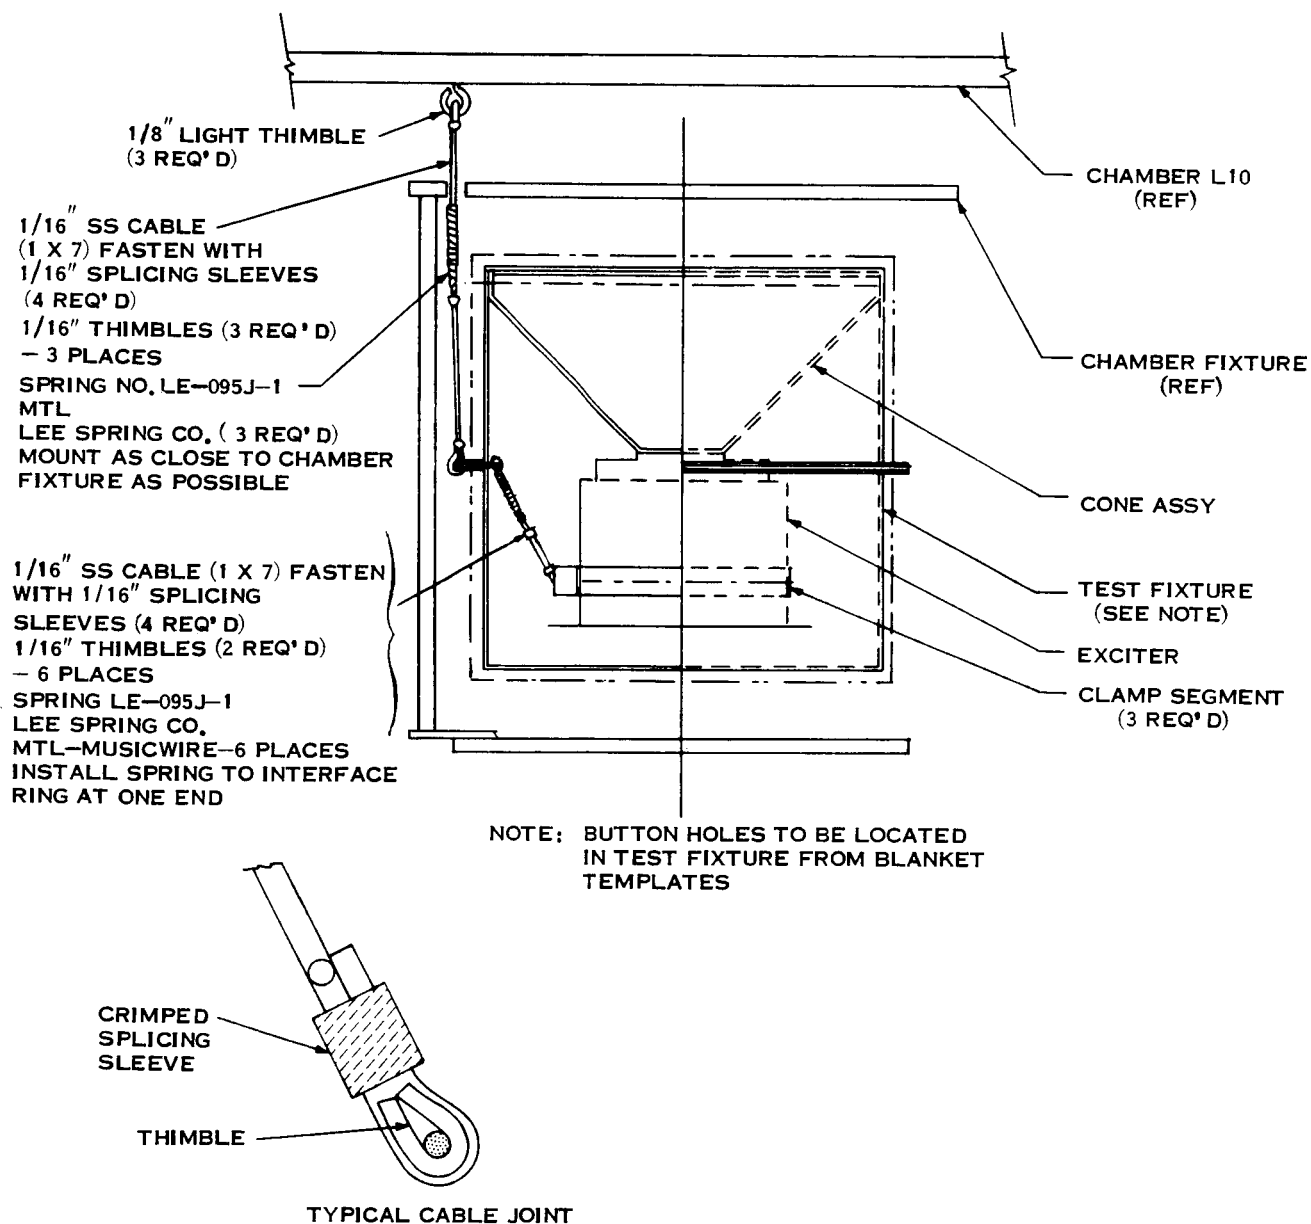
Long Term Thermal Vacuum Test Fixture
